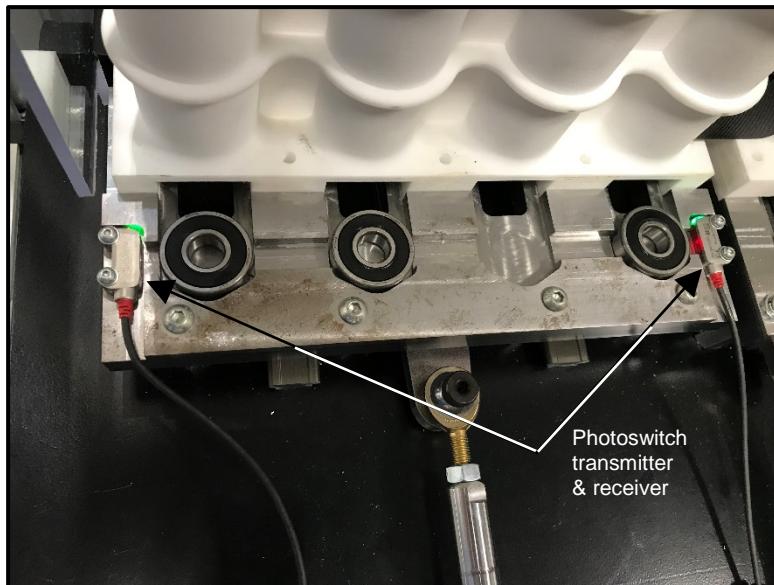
BEARING STATION – BEARING PRESENT SENSOR
